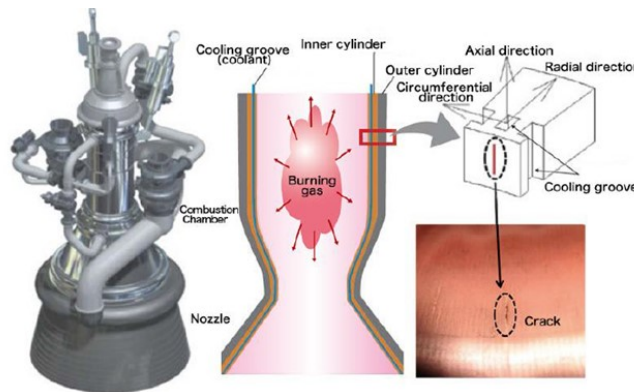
Liquid rocket engine (left), schematic of the combustion chamber (middle) and crack at the combustion chamber wall (right), from [16]
